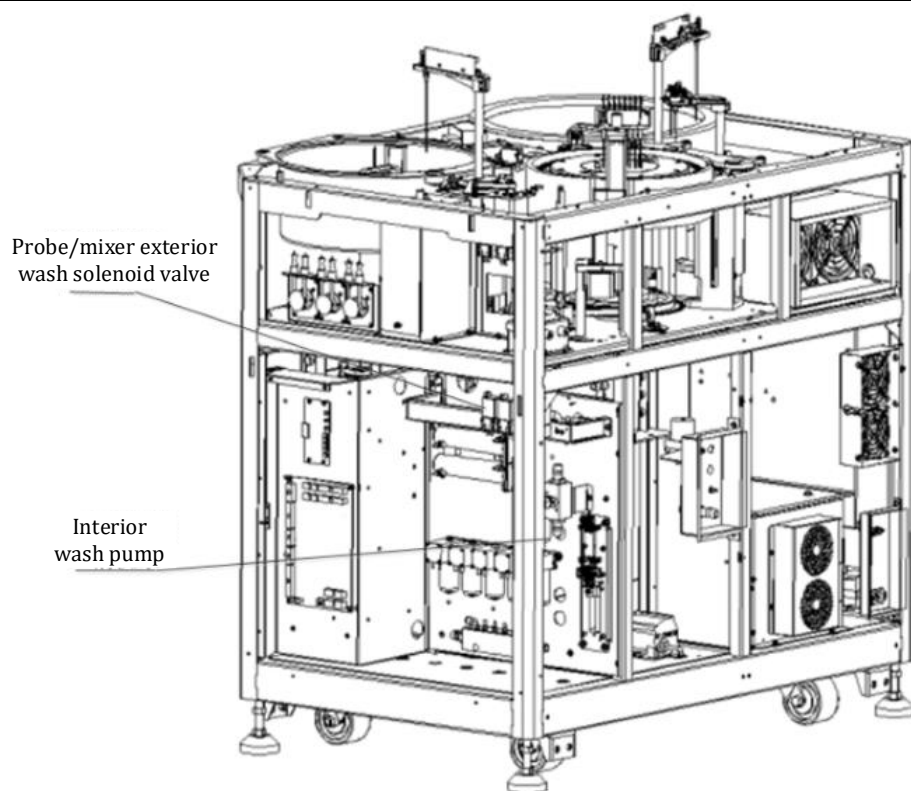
Assembly drawing of whole unit -- Probe wash module-rear view
